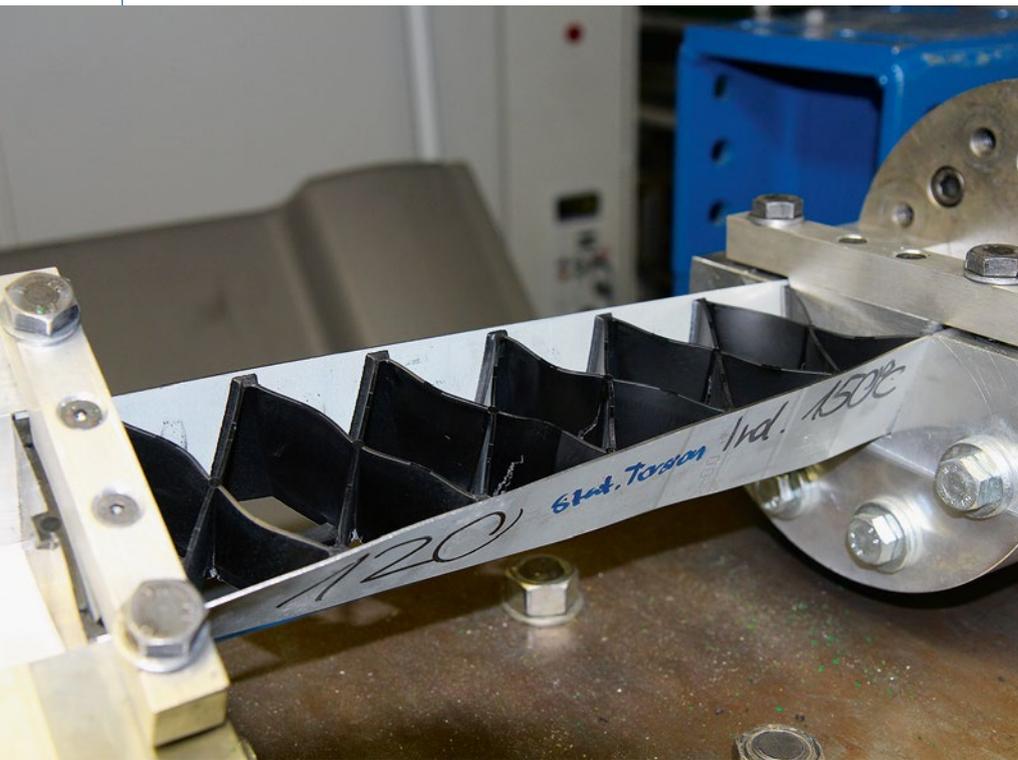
Structure of the torsion test for the Berlin test beam, where the failure of the ribbed section can be clearly seen (© inpro)
